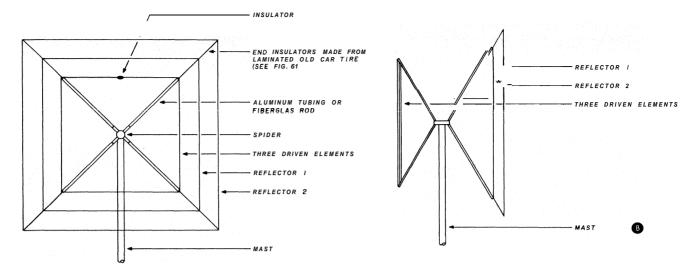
The modified quad antenna used at ZF1MA. Design uses three driven elements, which are fed with 450-ohm open-wire transmission line. Front view is shown in sketch A; side view in B.
